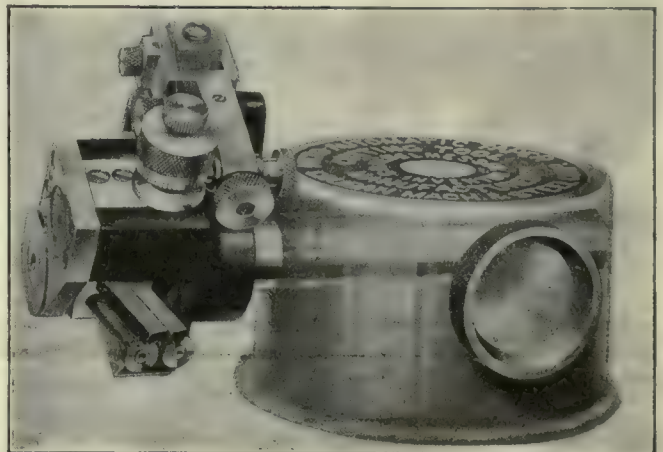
SIDE VIEW OF MICRO TAPER TURNING TOOL
